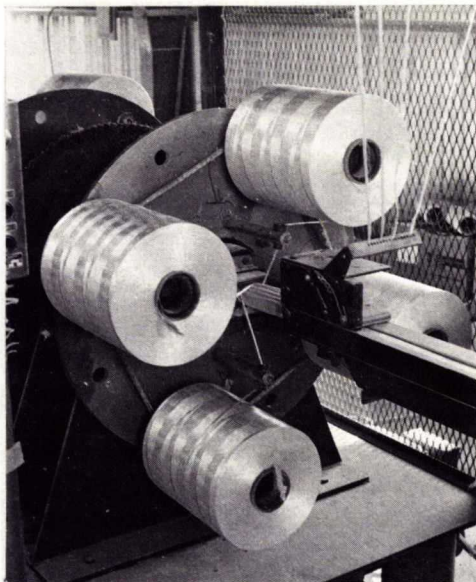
71-foot power cruiser – United States – wrapping machine. Courtesy Martin Weir Co., Inc., Chula Vista,
